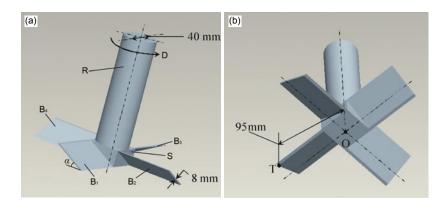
Illustration of straight-blade stirrer: (a) side view; (b) bottom view
